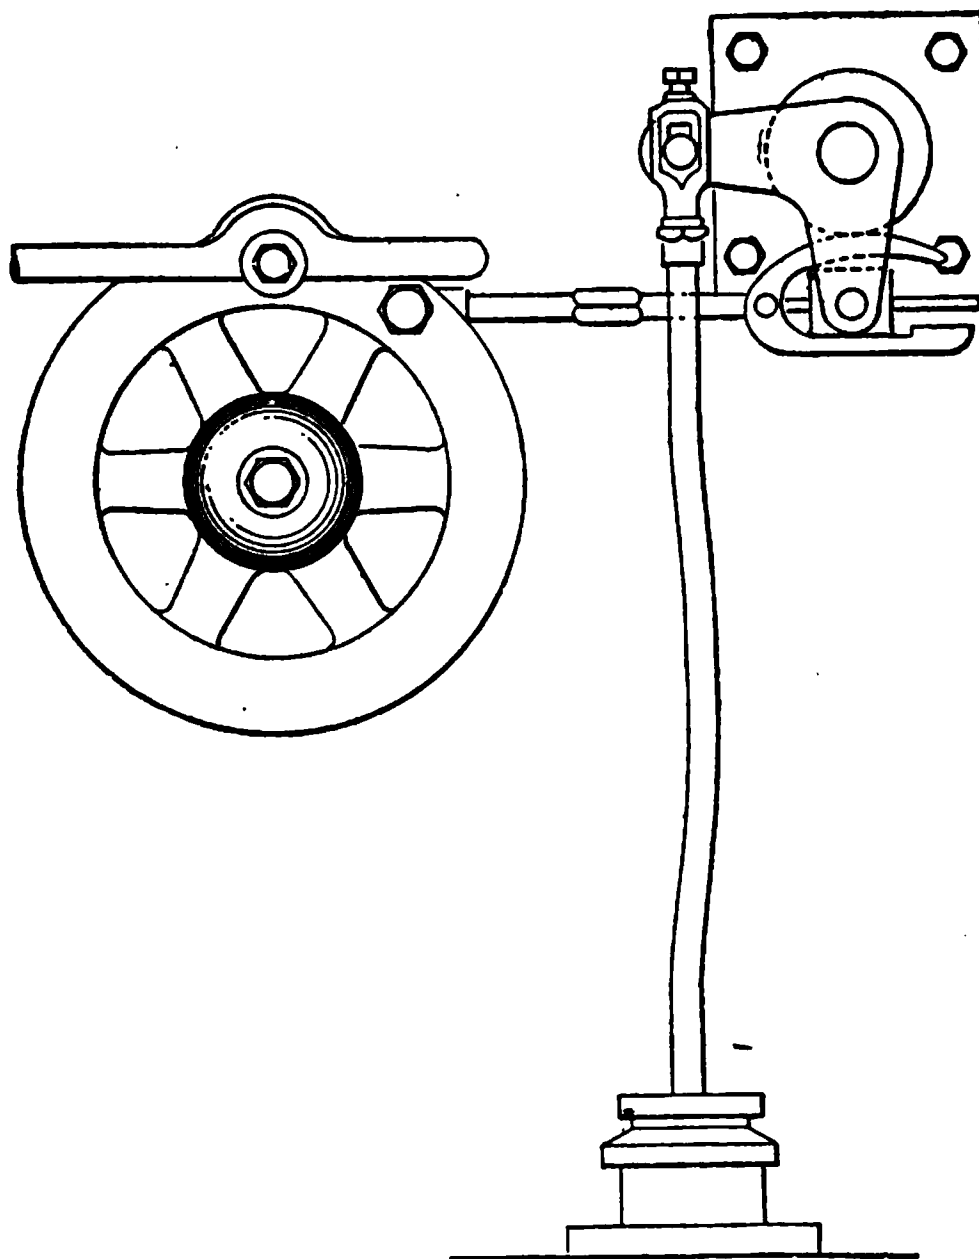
,046.—Dash pot rods too long. Before starting a Corliss engine, the engineer should make sure these rods are correctly adjusted, by moving the valve gear with the starting bar to the extreme positions, otherwise *the rods may be bent as shown, the bonnet castings broken, or both.
